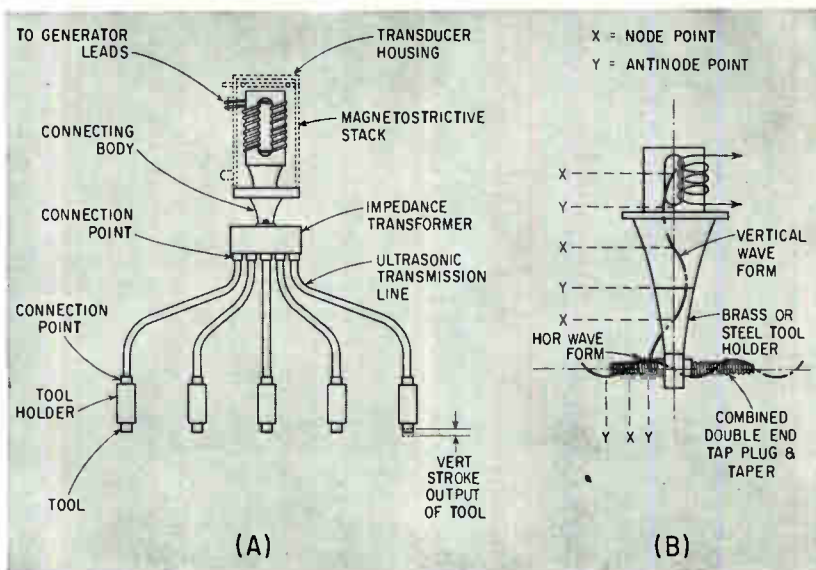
Multiple-drilling (Sheffield-A) and tap-drilling (Mullard-B) arrangements
